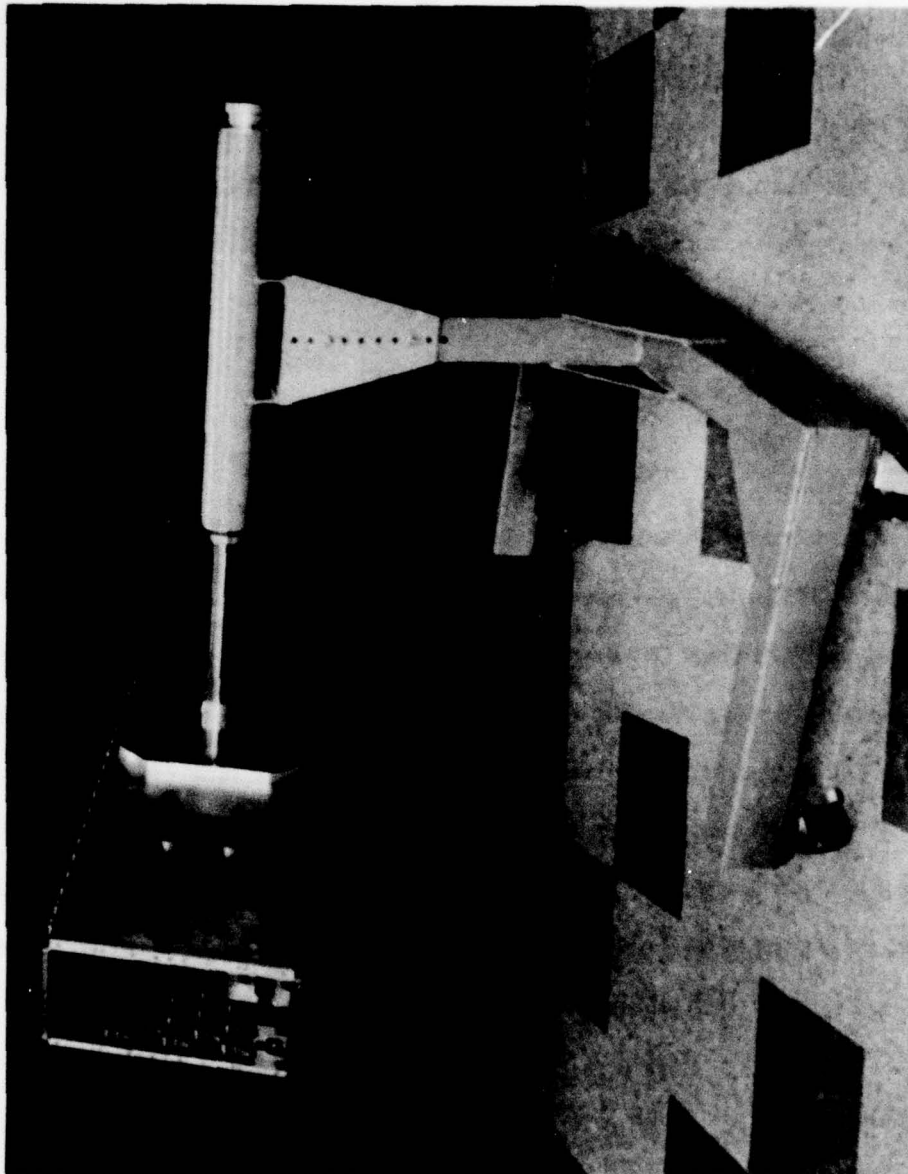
Chassis on which CRLS-229 Collimators, MONEX, SOLFLEX, and Data Processing Electronics Are Mounted. Weight relief of the panels was accomplished by computer-controlled milling machines. In this picture, the chassis is supported by a fixture used to balance the entire experiment.
